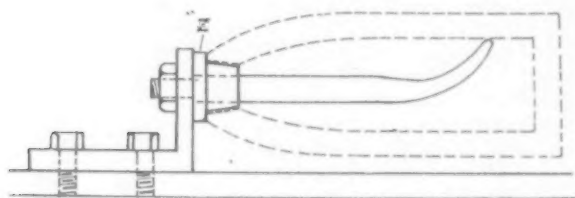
How the American Radiator Co. Locates Turning Center of Casting
